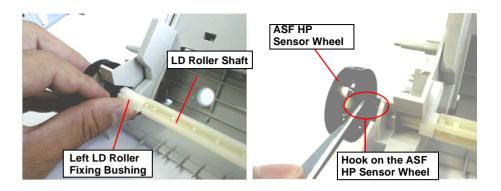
Removing the LD Roller Fixing Bushing & ASF HP Wheel
